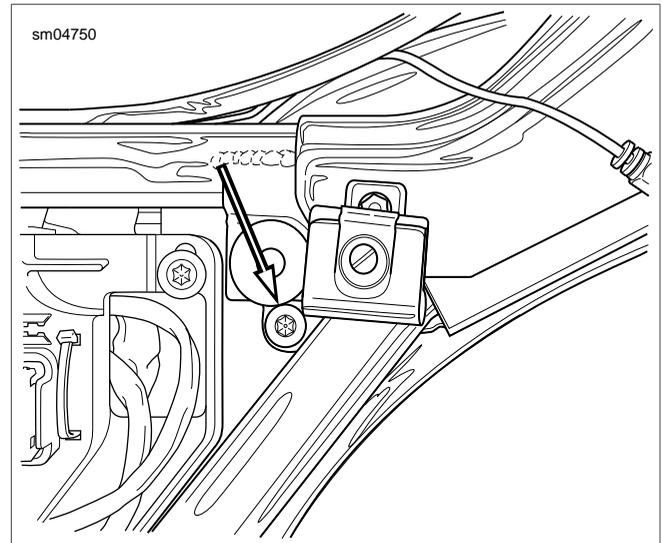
Rear Fender Side Mounting Screw (Left Side)
